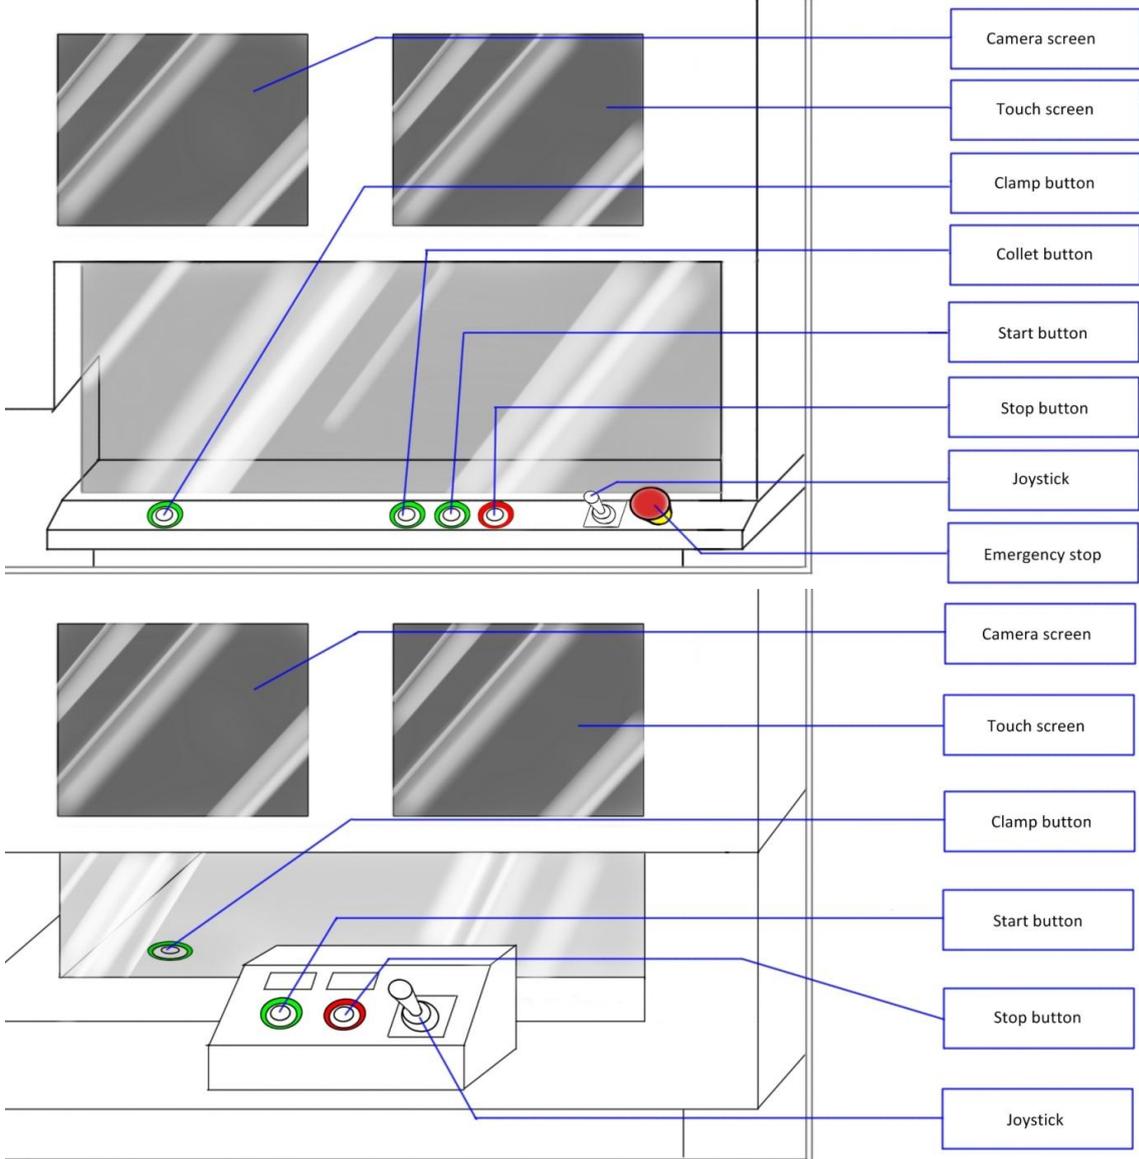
The physical user-interface of the laser welding machine type 1410 (above) and type 1244 (beneath).
